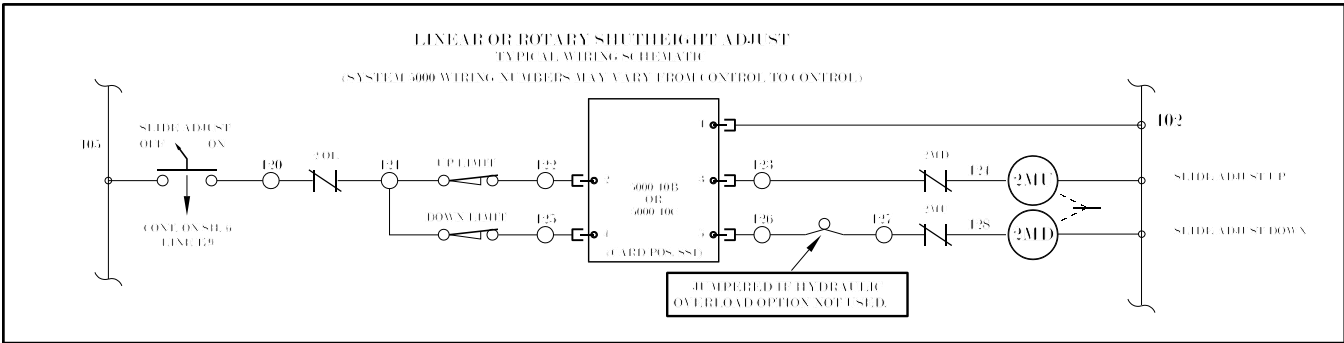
Typical Slide Motor Starter Wiring Without Auxiliary Contactor
